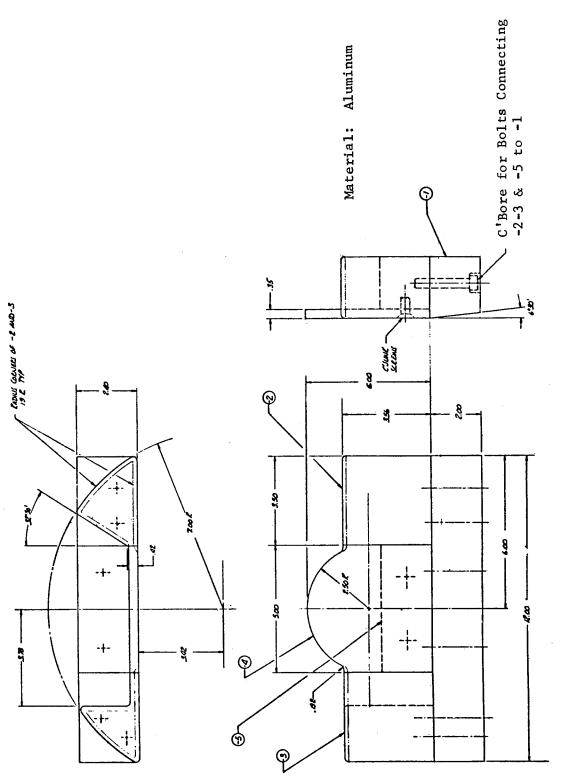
Layup Tool, Internal Bearing Support - Helicopter Transmission Housing (WRD Drawing No. 4713).
